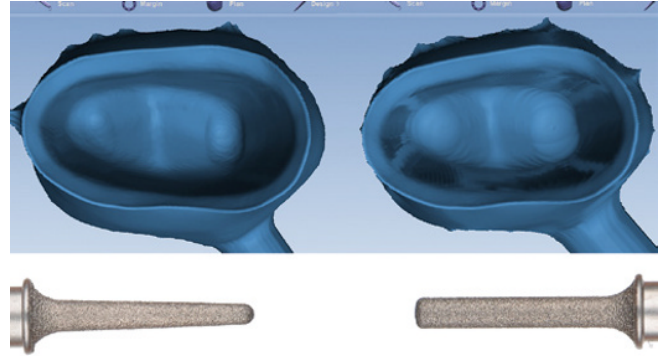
Typical milling tools used for zirconia or PMMA.
